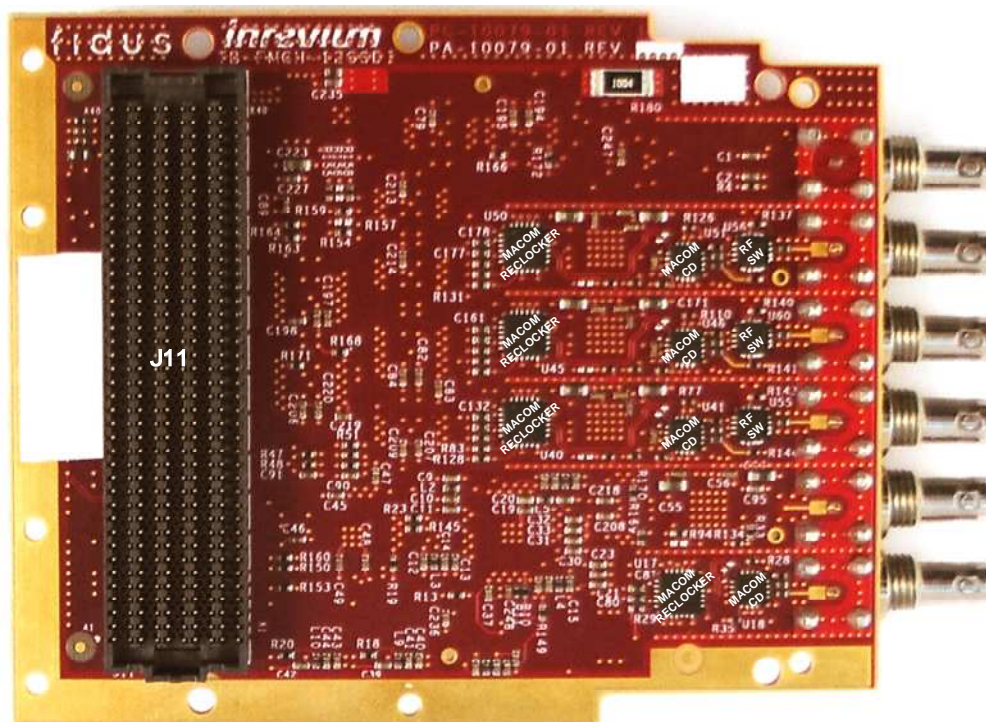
External View of TB-FMCH-12GSDI (Solder Side)
